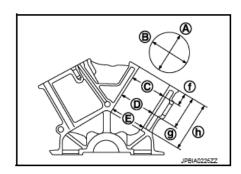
Identifying Cylinder Bore Wear, Out-Of-Round And Taper Measuring Dimensions
